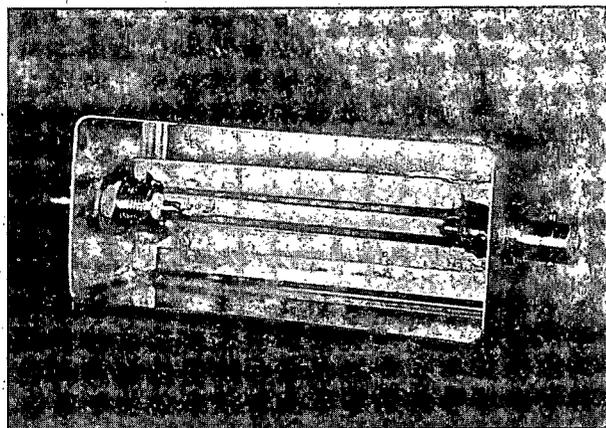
For the single filter assembly, this method of microstrip mounting is easier to implement than that shown in Figure 4.
